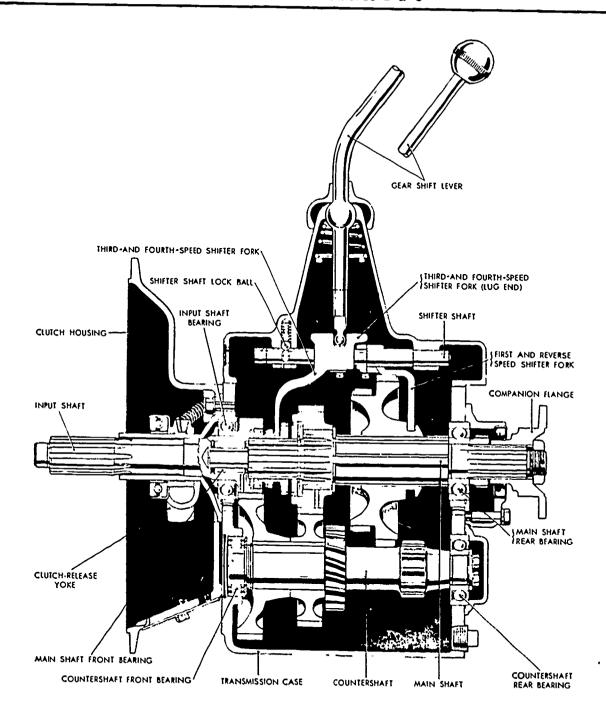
Constant-mesh transmission assembly—sectional view.
